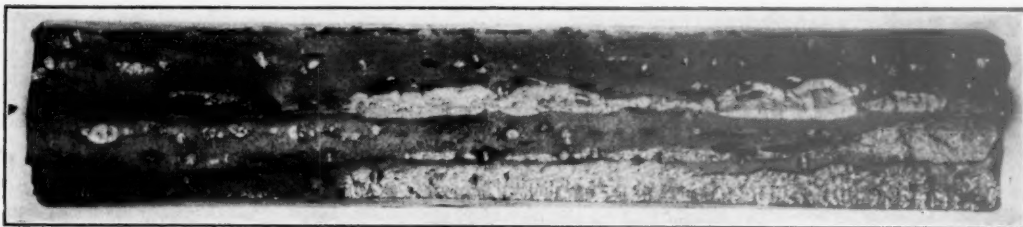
FRACTURE OF WELDED TENSILE SPECIMEN.
